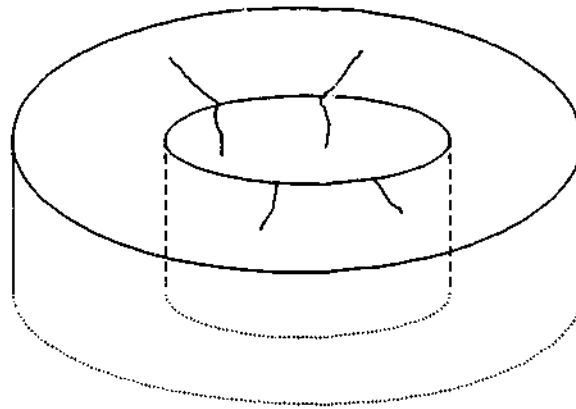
Corner cracking at an external corner, eg. tube penetration into a thick walled header.
